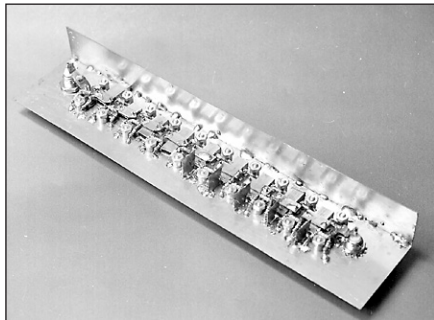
Solder one of the 1-inch-wide chassis side pieces in place to make the assembly more rigid during construction. Solder the side piece to the edge of the top plate that faces the “through” side of the switches; this makes the rest of the assembly easier.
